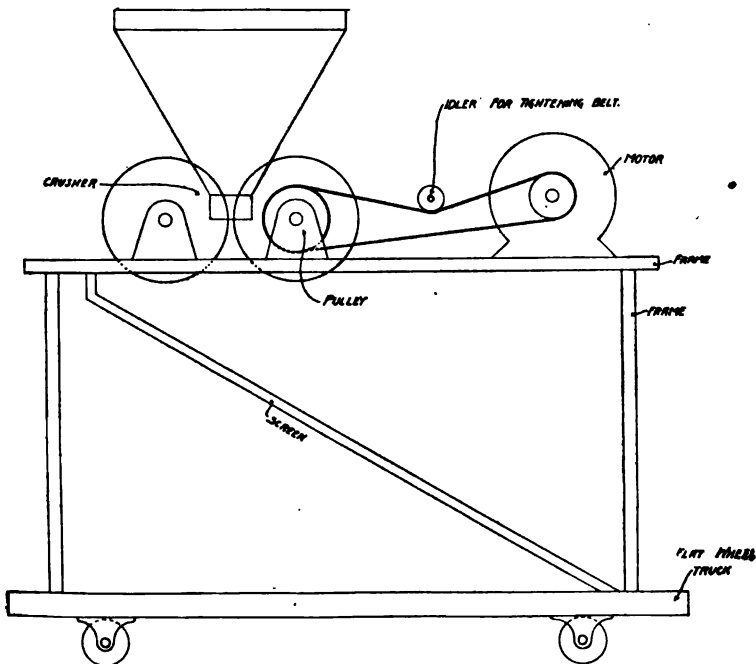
FIG. V. COKE CRUSHER WITH MOTOR ATTACHMENT.
